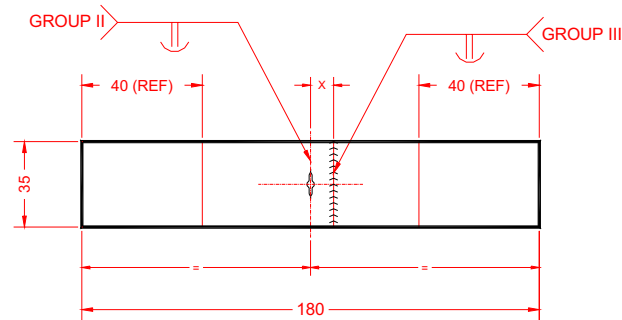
M(T) specimen configuration for fatigue crack growth tests
